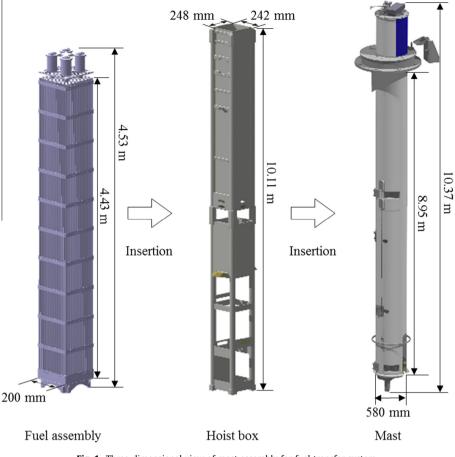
Three-dimensional view of mast assembly for fuel transfer system.
